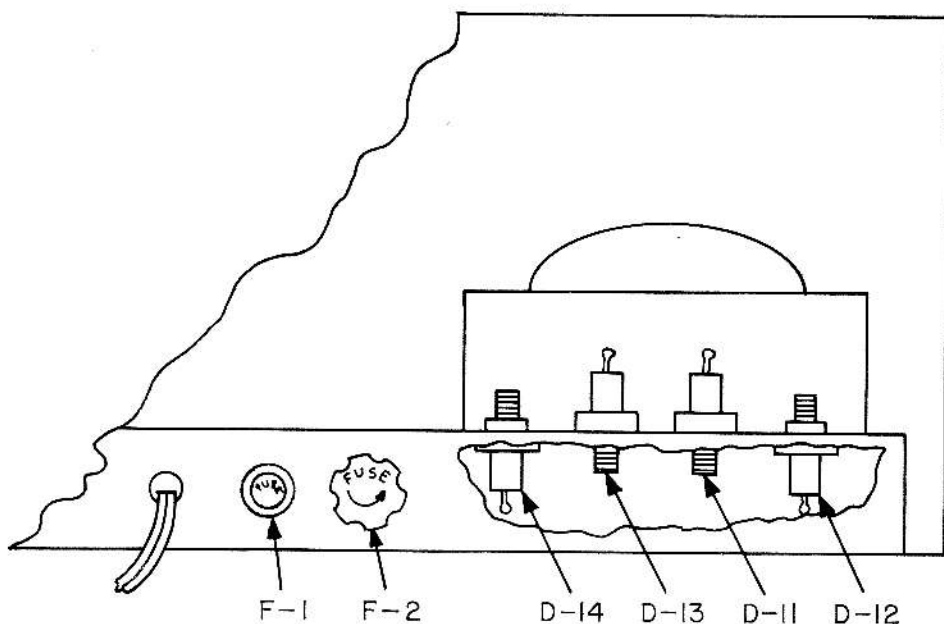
Rear View of Chassis Apron Showing Two Fuses and 4 Diodes.
